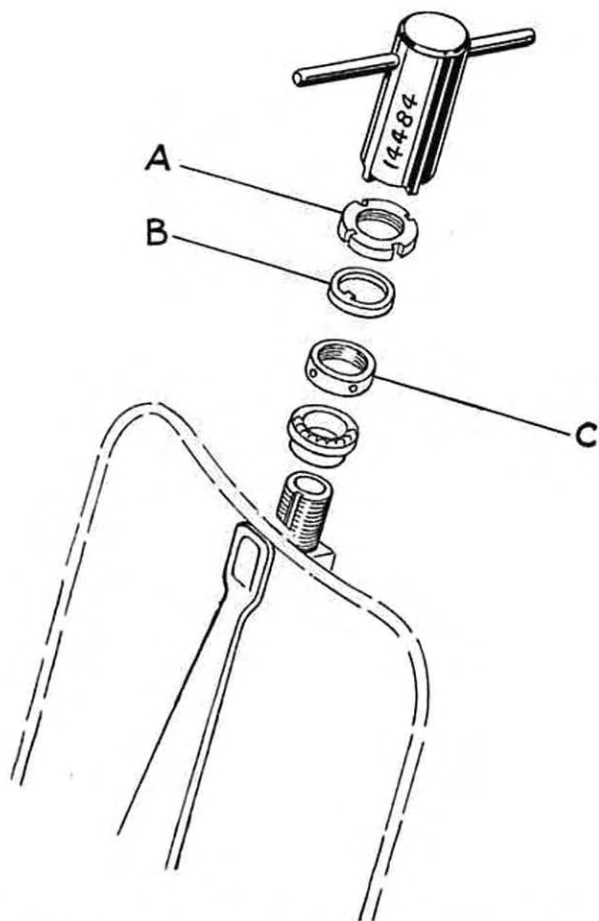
Removing Top Ball Bearing of Steering Column.
